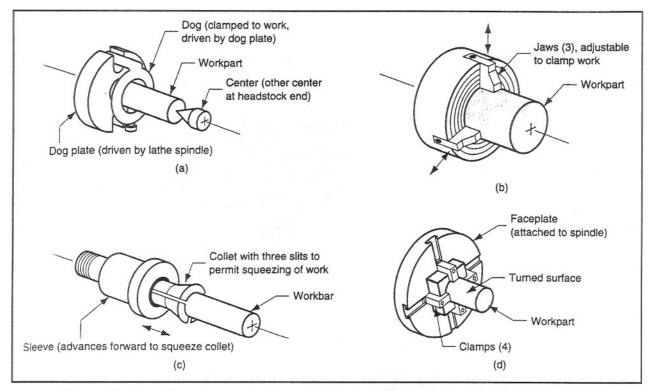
Four fixturing methods used in lathes: (a) mounting the work between centers using dog, (b) three-jaw chuck, (c) collet, and (d) face plate for noncylindrical workparts.
